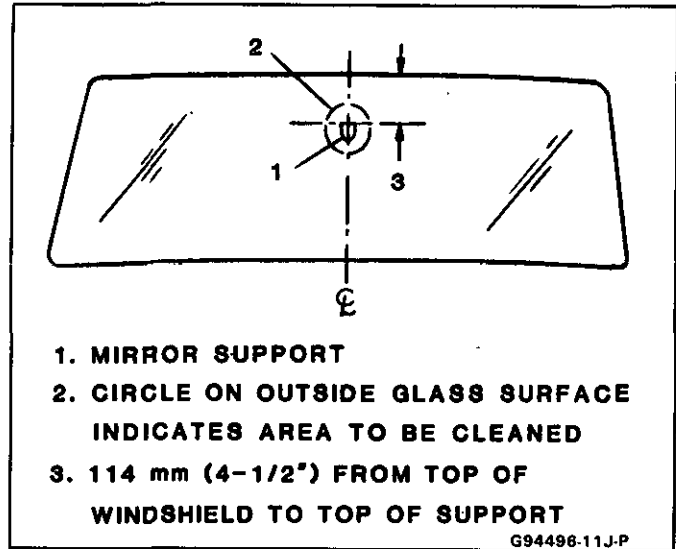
Locating Bonded Rearview Mirror Support on Glass
